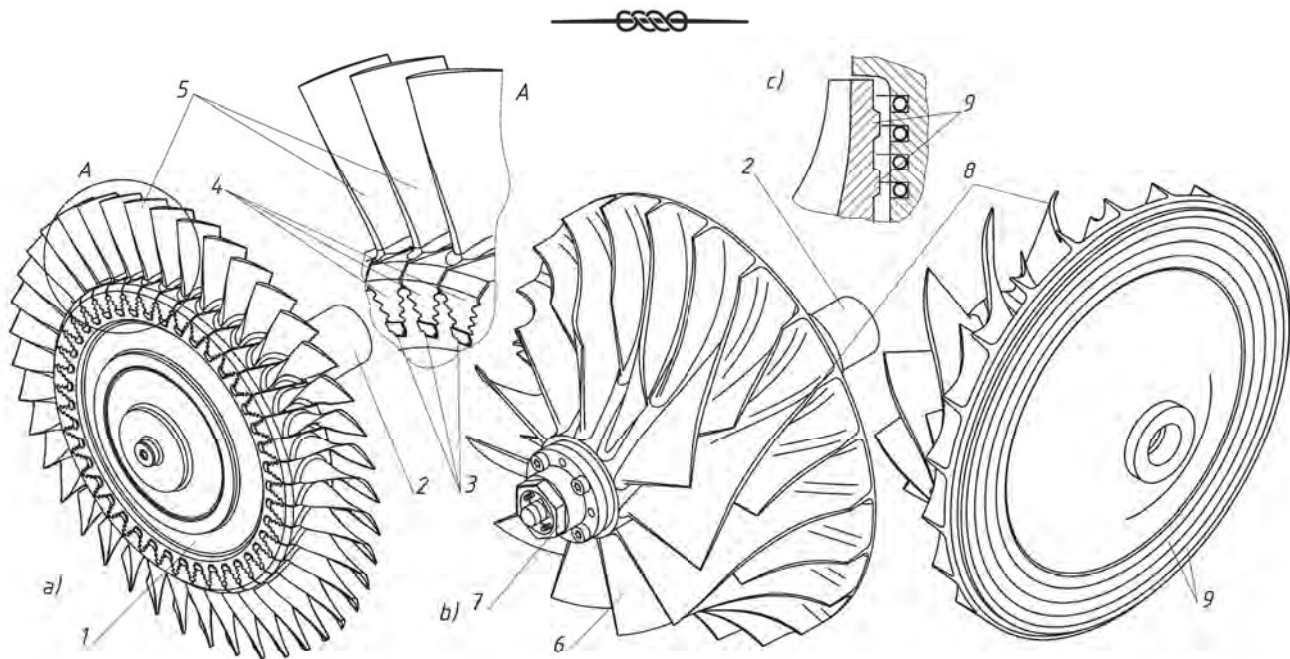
Turbine wheel (a) and compressor wheel (b) of a TCA type turbocharger from MAN. Labyrinth seal of the compressor wheel (c): 1 – turbine wheel hub; 2 – rotor shaft; 3 – locking strips for fastening the blades; 4 – fastening of the blade shank of the «christmas tree» type; 5 – turbine blades; 6 – compressor blades; 7 – compressor wheel fastening nut; 8 – compressor wheel hub; 9 – protrusions of the labyrinth seal (adapted from [48])
